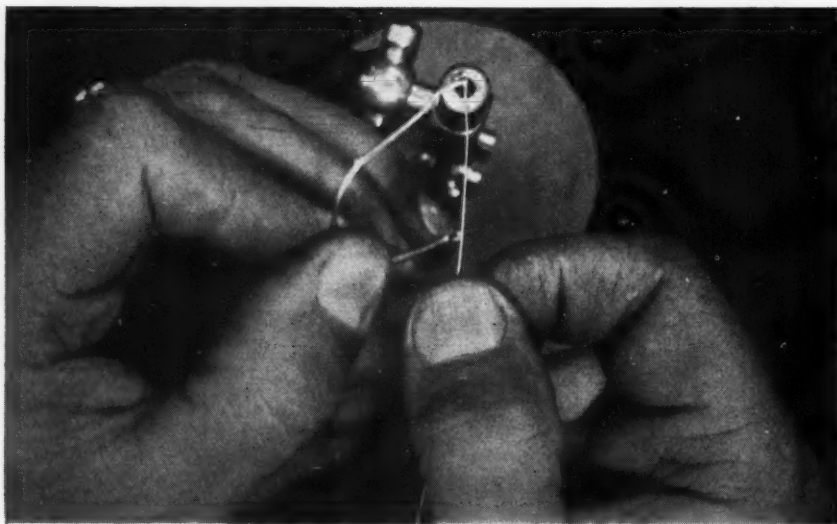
Soldering a piece of annealed 0.022 inch Deepep wire to posterior end for a lock.
